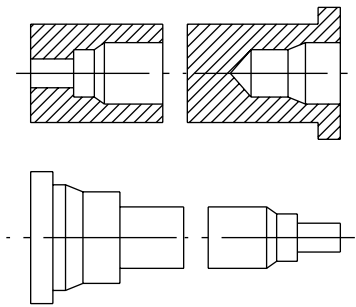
Parts to be machined should be rigid enough to withstand the cutting forces
